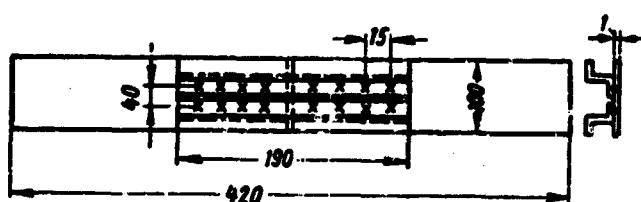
Structural elements for test for static shear and vibration (D16T, 1 + 2 mm).
